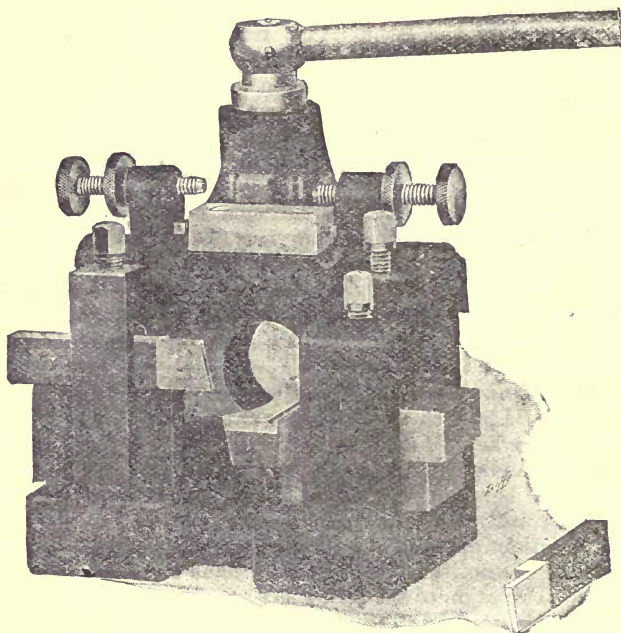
CUT-OFF TOOL REST SHOWING STEPPED CUT-OFF TOOL.
